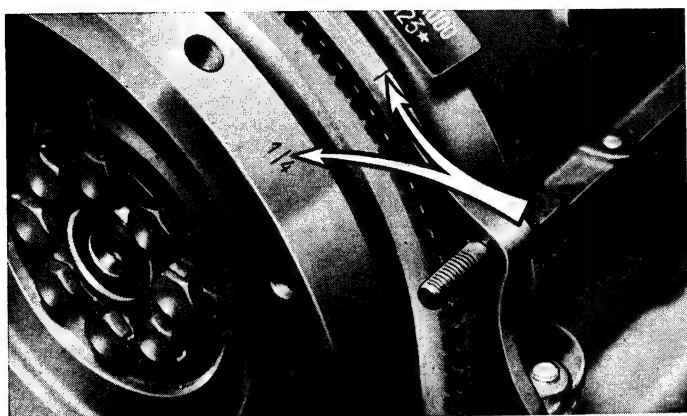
Reference marks on flywheel and crankcase for valve gear and ignition timing on engine 118 B.000.
